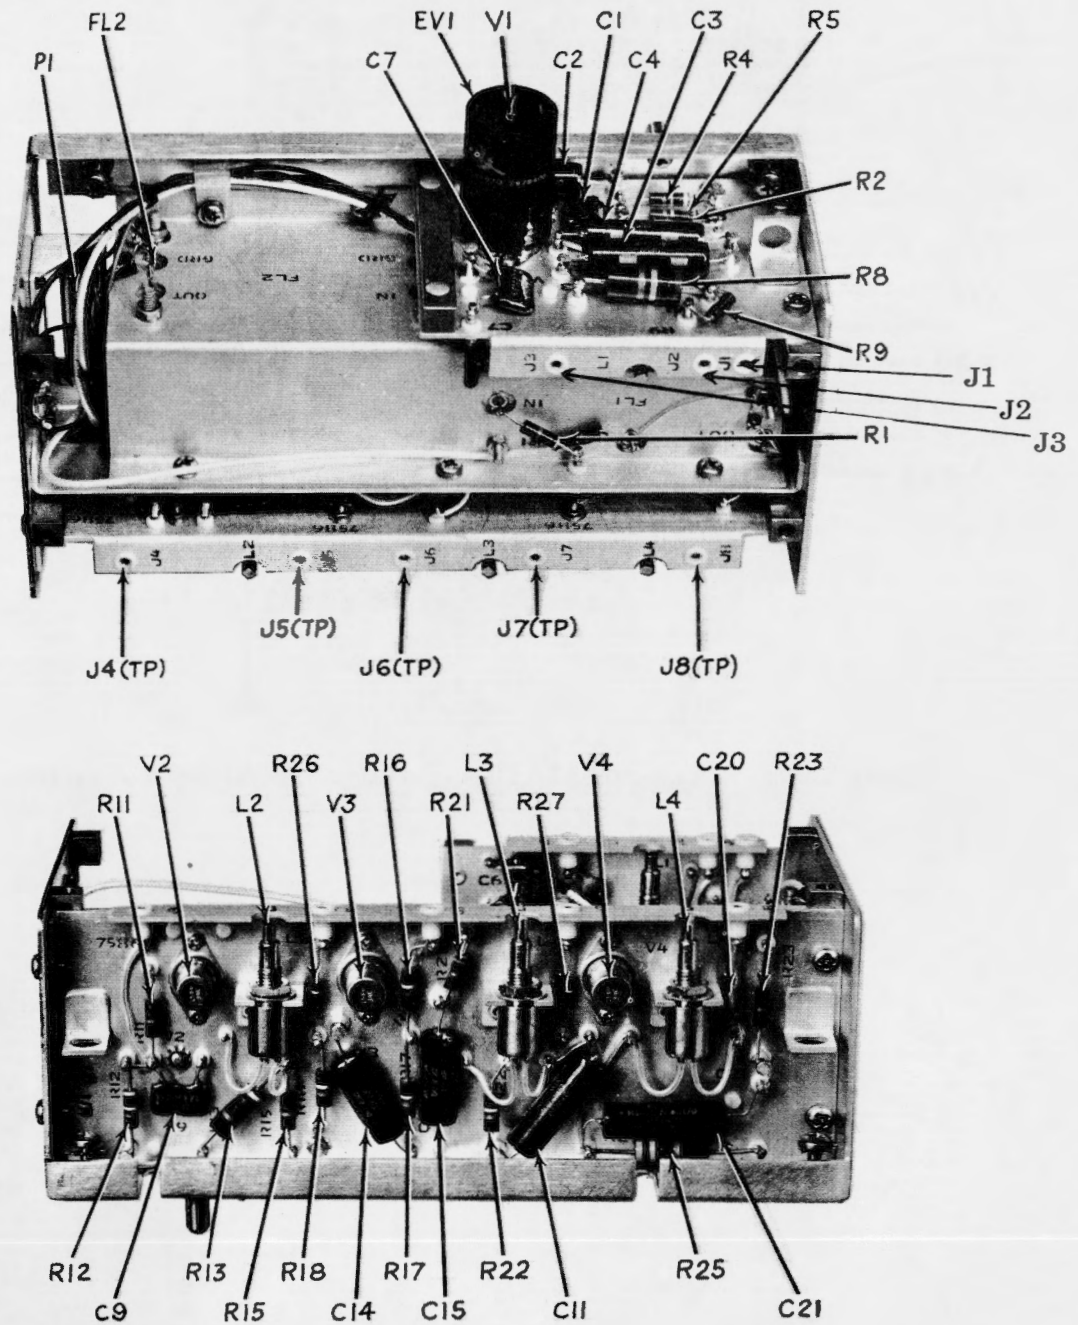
1st Injector A1A10, Parts Location and Test Points
